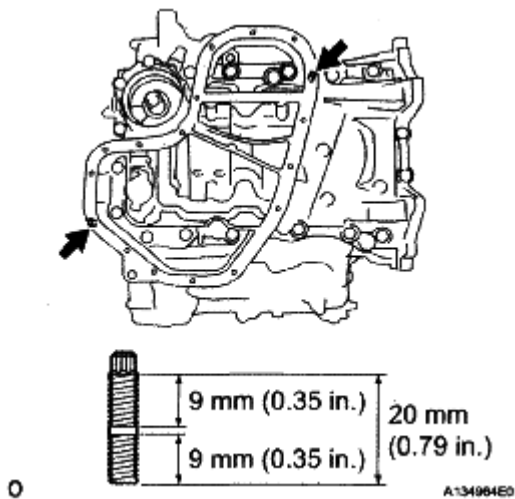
Identifying No. 2 Oil Pan Sub-Assembly Stud Bolts Length
